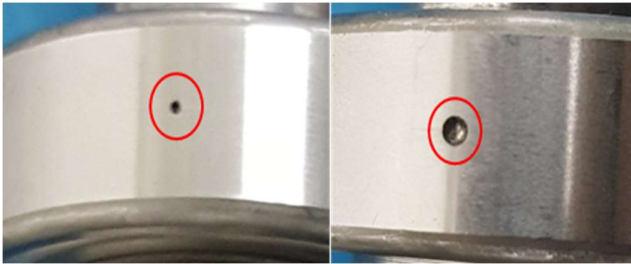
Bearing with a hole 0.5 mm (left) and hole 2 mm (right).
